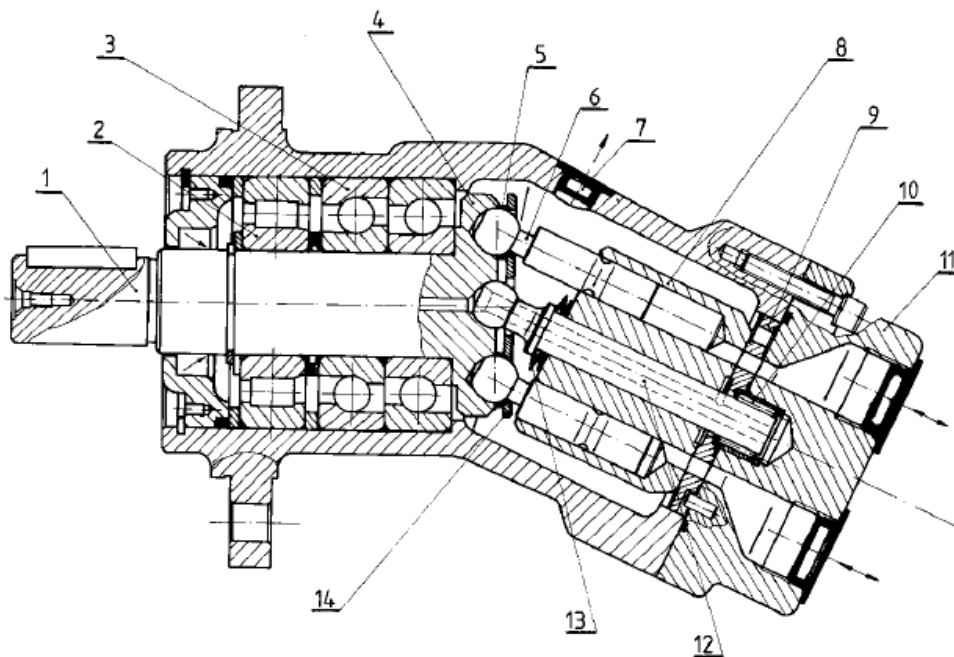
Axial piston motor and tilted block: 1 - shaft, 2 - radial cylindrical roller bearing, 3 - angular ball bearing, 4 - piston disc drive, 5 - spherical bush, 6 - rod; 7 - housing, 8 - cylinder block 9 - Distribution board, 10 - needle roller bearing, 11 - cover joints; 12 - tree guide cylinder block; 13 - spring disc; 14 - connecting rod retaining plate
